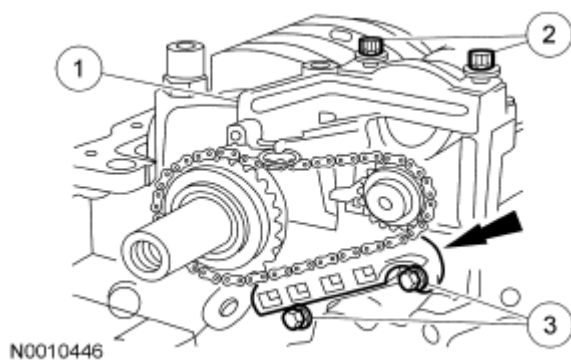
Locating Balance Shaft Tensioner, Bolts And Balance Shaft Chain Guide
